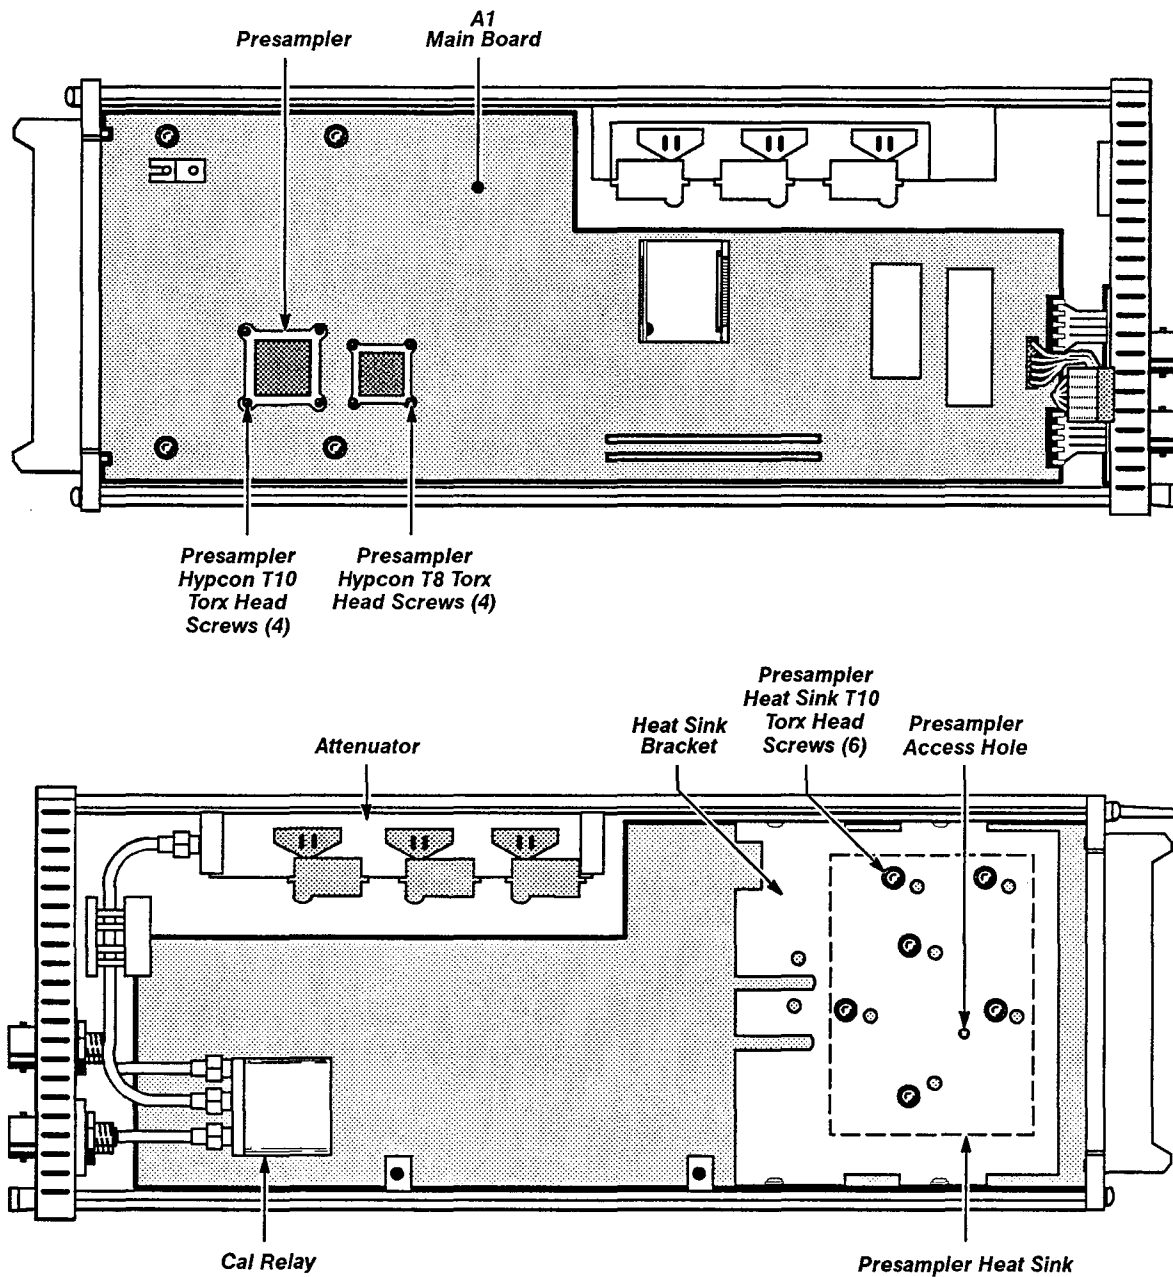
Removing/Replacing the Presampler Heat Sink
